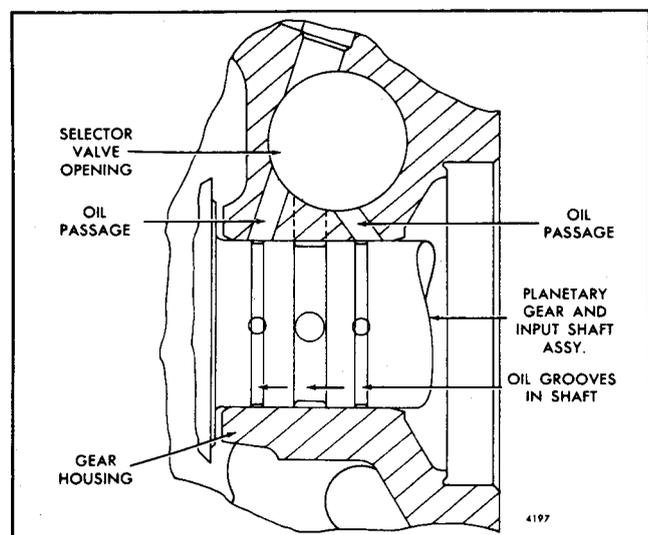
Location of Planetary Gear and Reduction Gear Input Shaft in Reverse Gear Housing Without Bushings
